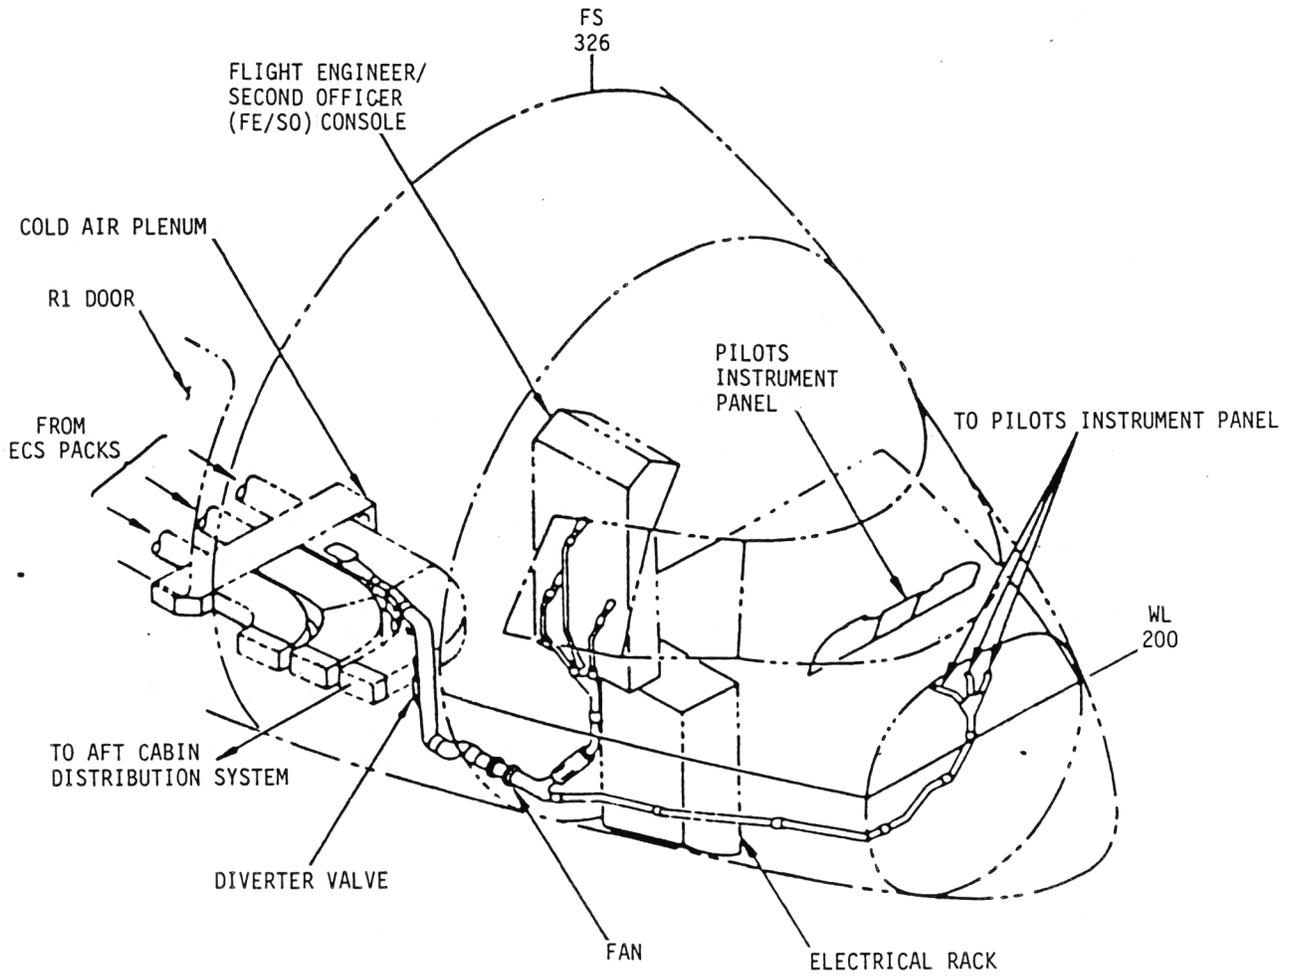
LOCKHEED L-1011 INSTRUMENT PANEL COOLING SYSTEM
